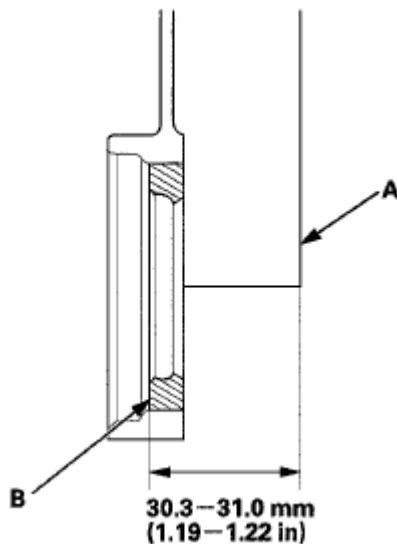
Tapping Oil Seal Into Cam Chain Case
